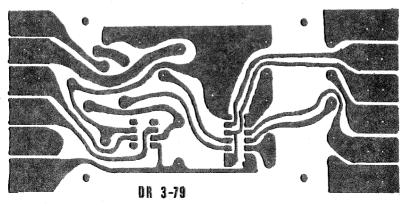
The printed circuit board copper pattern (reduced size  $\times$  0.81; original size 148  $\times$  62 mm).
